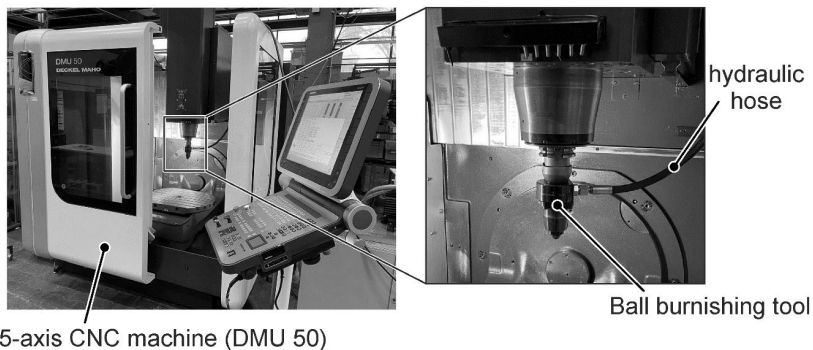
5-axis CNC machine DMU 50 and ball burnishing tool
